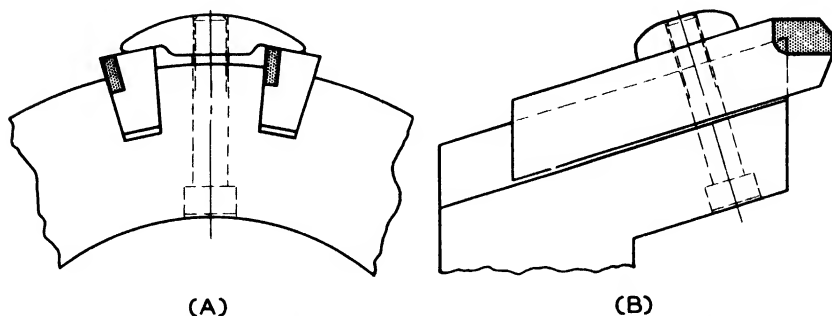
Details of the Continental, Inserted-Blade, Face Milling Cutter
